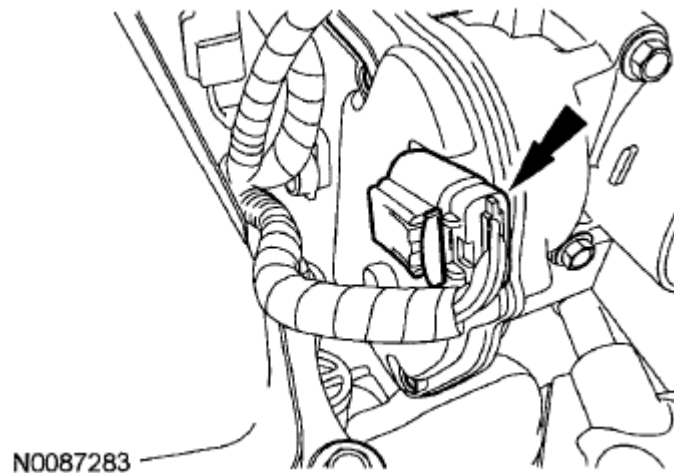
Locating Electronic Throttle Control Electrical Connector
